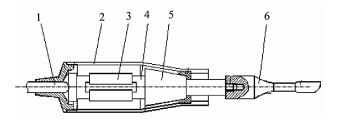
Ultrasonic instrument with a magnetostrictive transducer: 1 - power supply cord; 2 - case; 3 - winding; 4 - magnetostrictor; 5 - matching element; 6 - hub tool
